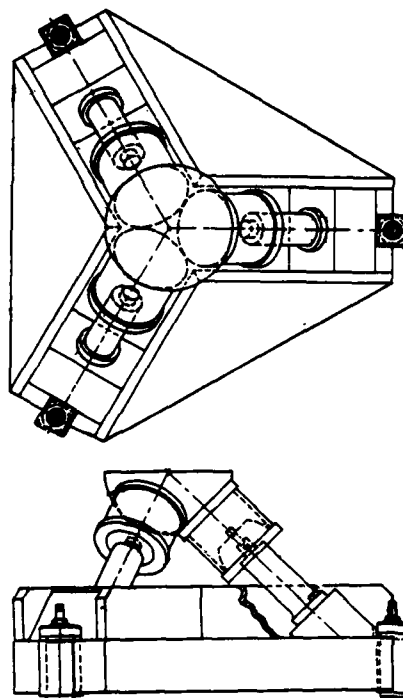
Two View Sketch of Triaxial Shaker Assembly.
